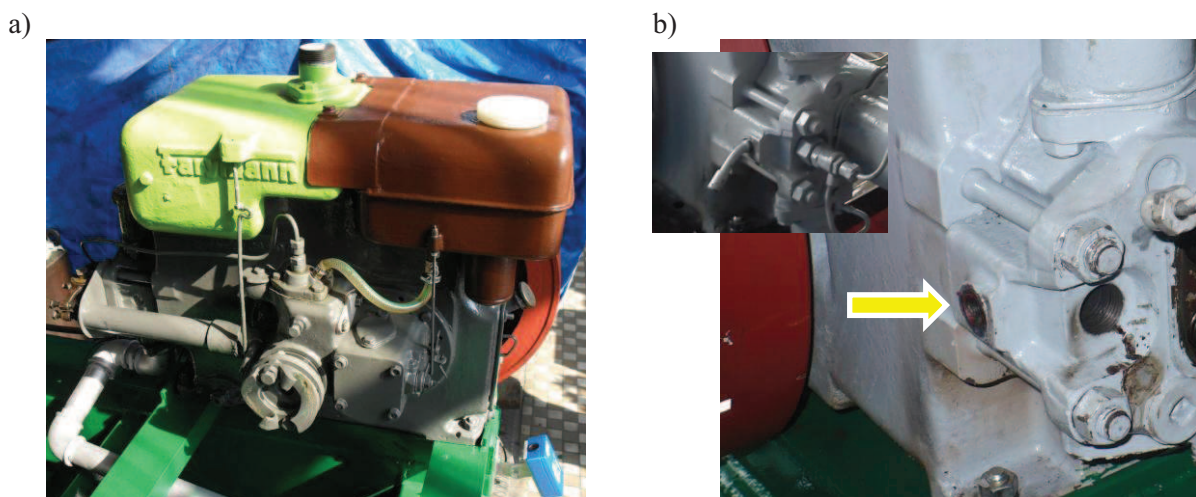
View Farymann Diesel engine type D (a) and slot indicator assembly (b) at the ignition paper holder
